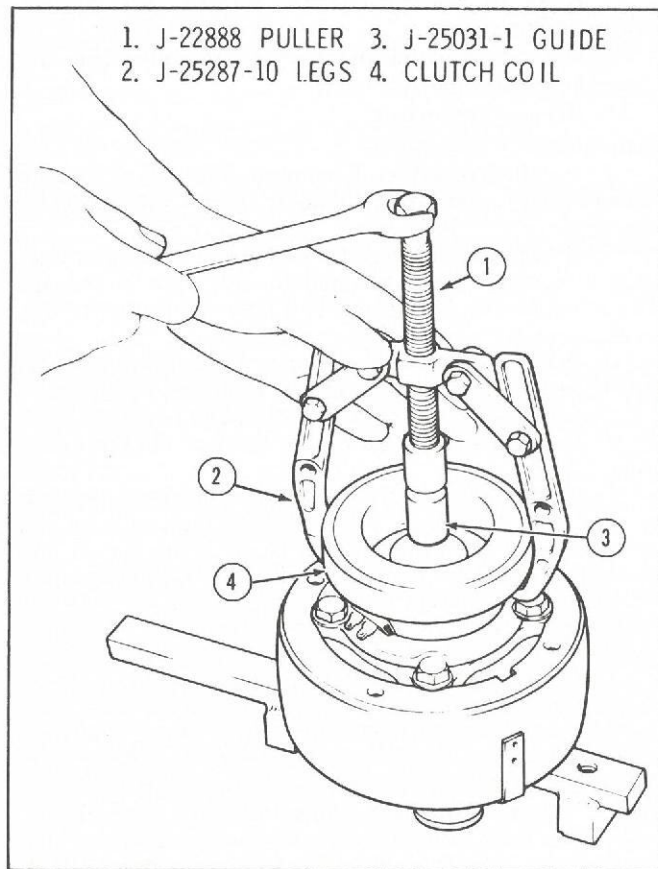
C1-1—Removing Poly Groove Clutch Coil
